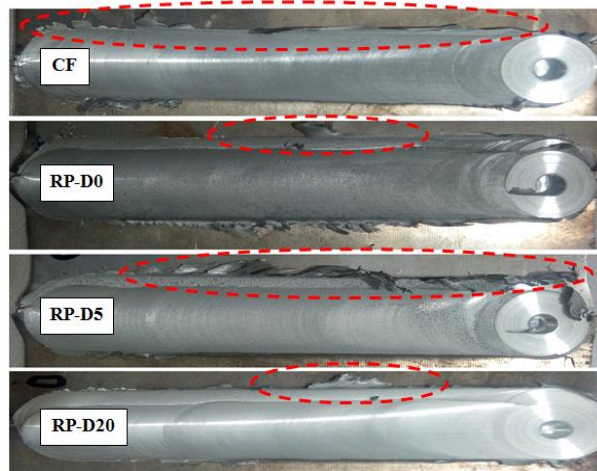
A flash defect on surfaces in some welding specimens
